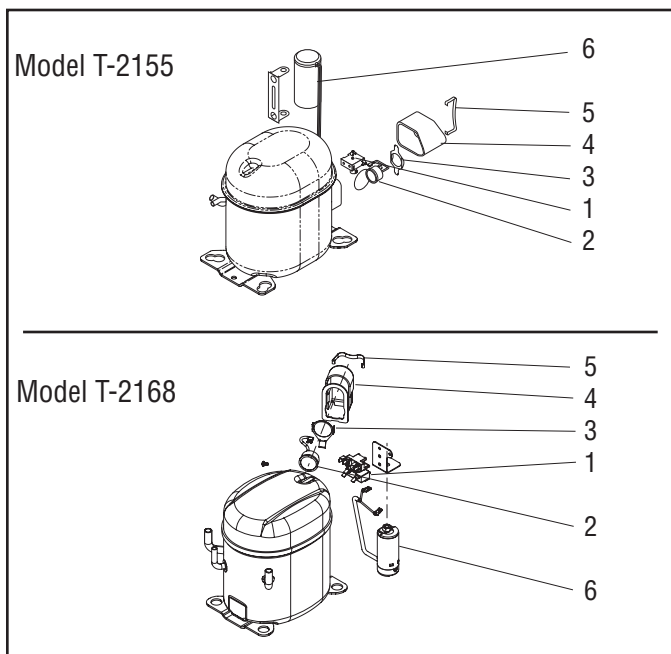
COMPRESSOR ELECTRICAL COMPONENTS
